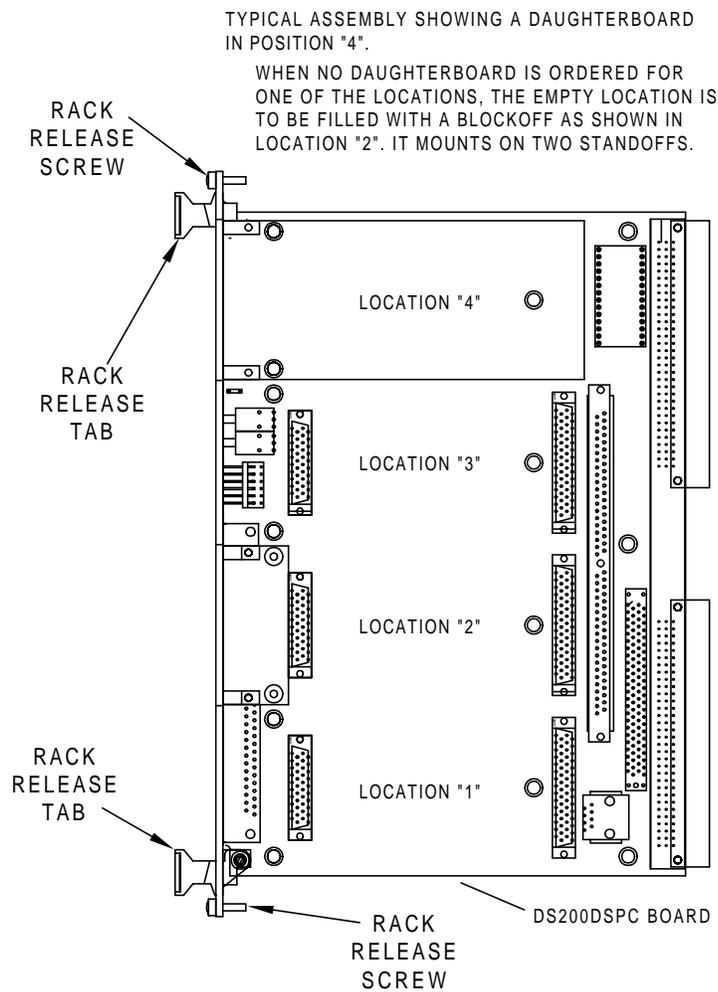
DSPC Board Daughterboard and Blockoff Assemblies
